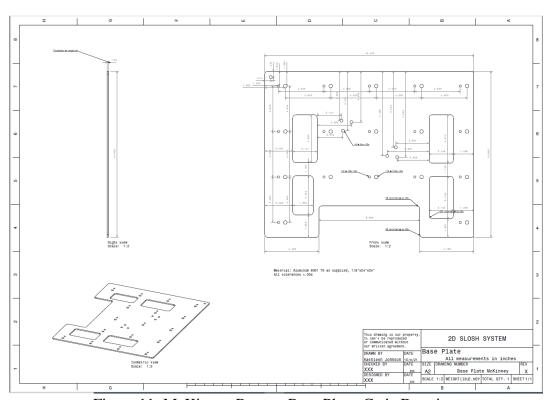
McKinney Bottom Base Plate, Catia Drawing
